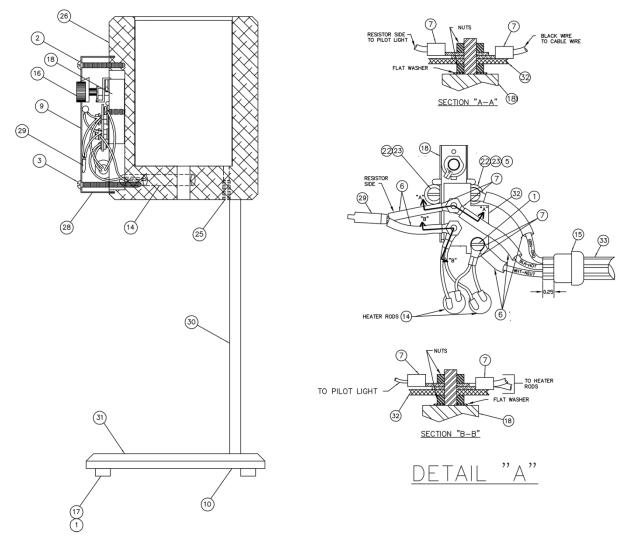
Heating Jacket Assembly, 175 ml, 115V
